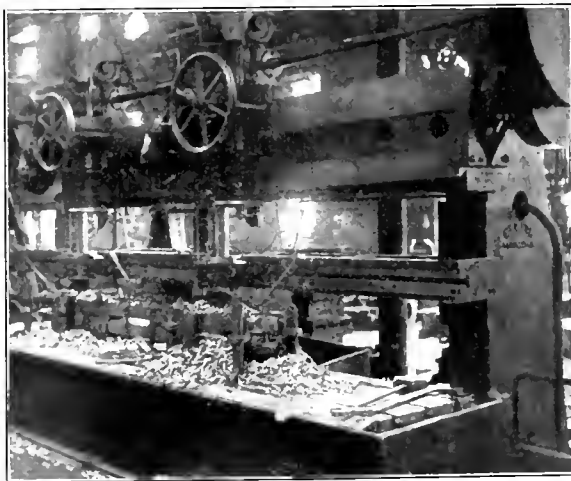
Boring the Rods on a Double Spindle Boring Machine
